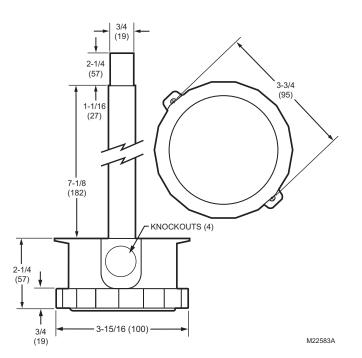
Duct-mount sensor dimensions in in. (mm).
